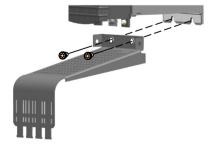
Motor Modules 45 A and 60 A - mounting the shield connection plate
